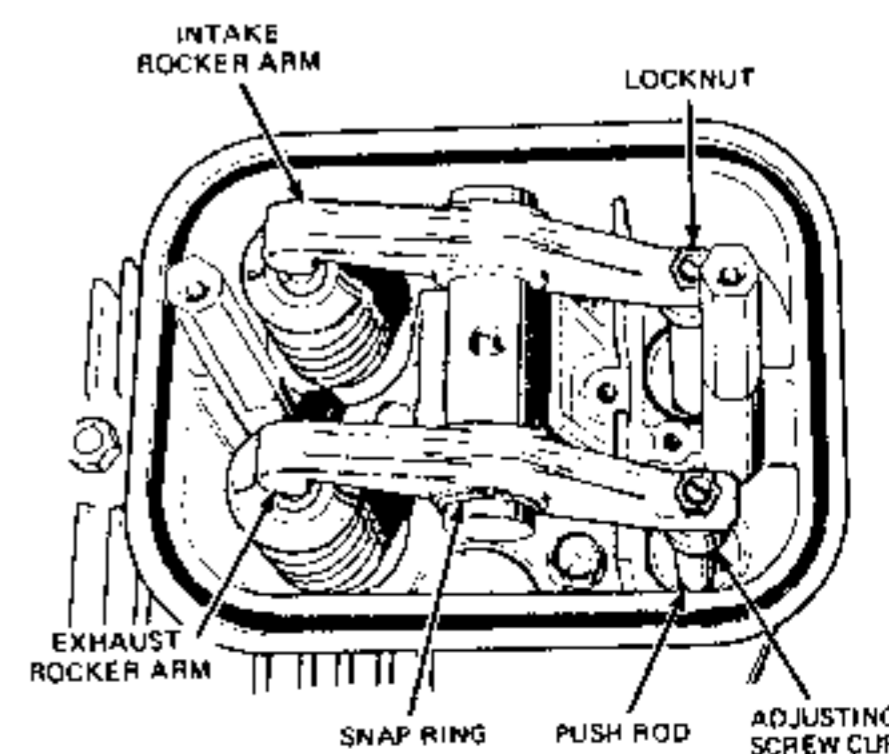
View showing rocker arms used on all models. Slotted adjusting screws were used on early production engines. Later engines have adjusting nut on screw below rocker arm.
